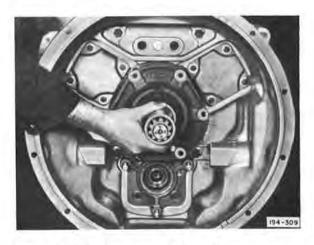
Removing Main Driving Pinion Bearing Cover
